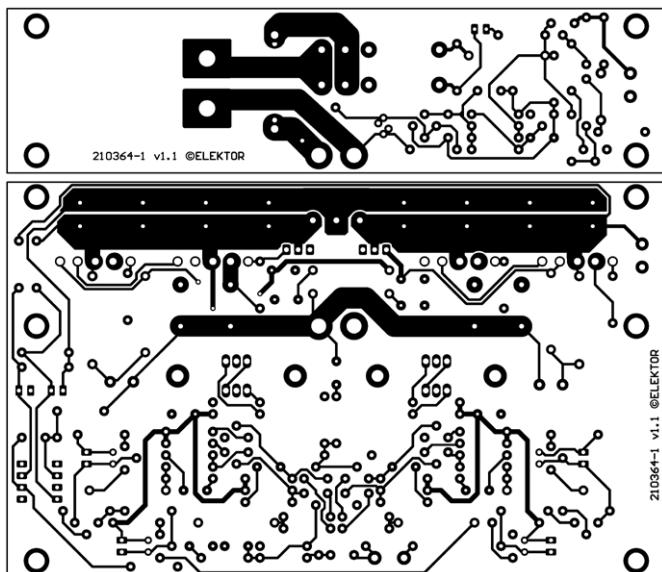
Bottom-side copper layout for both PCBs (210364-1 v1.1).
